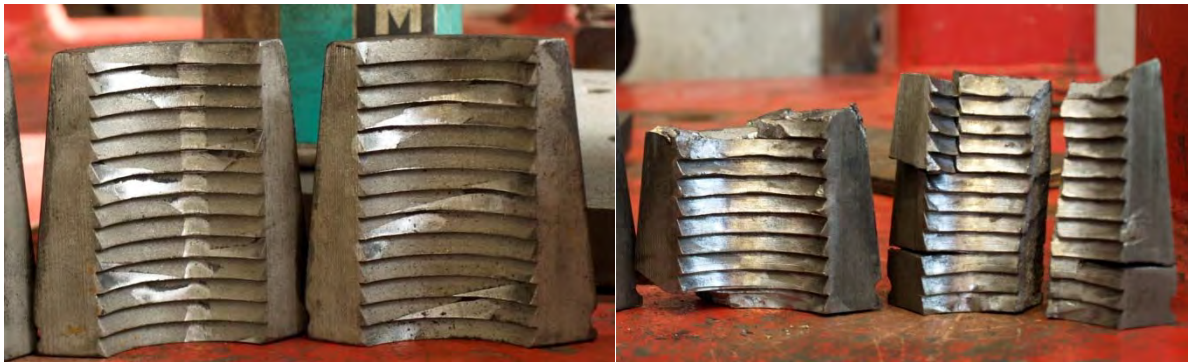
No. 18 bar wedges undamaged (left) and after testing Mill 1 bars (right)
